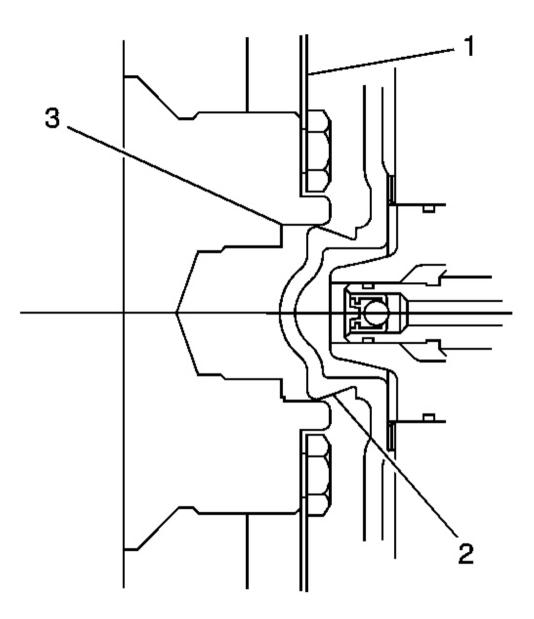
Aligning The Torque Converter Hub In The Engine Crankshaft Courtesy of GENERAL MOTORS CORP.
